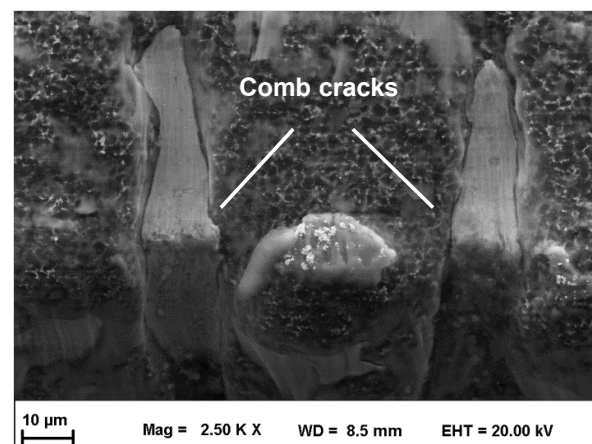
The presence of thermal cracking at the cutting edge
